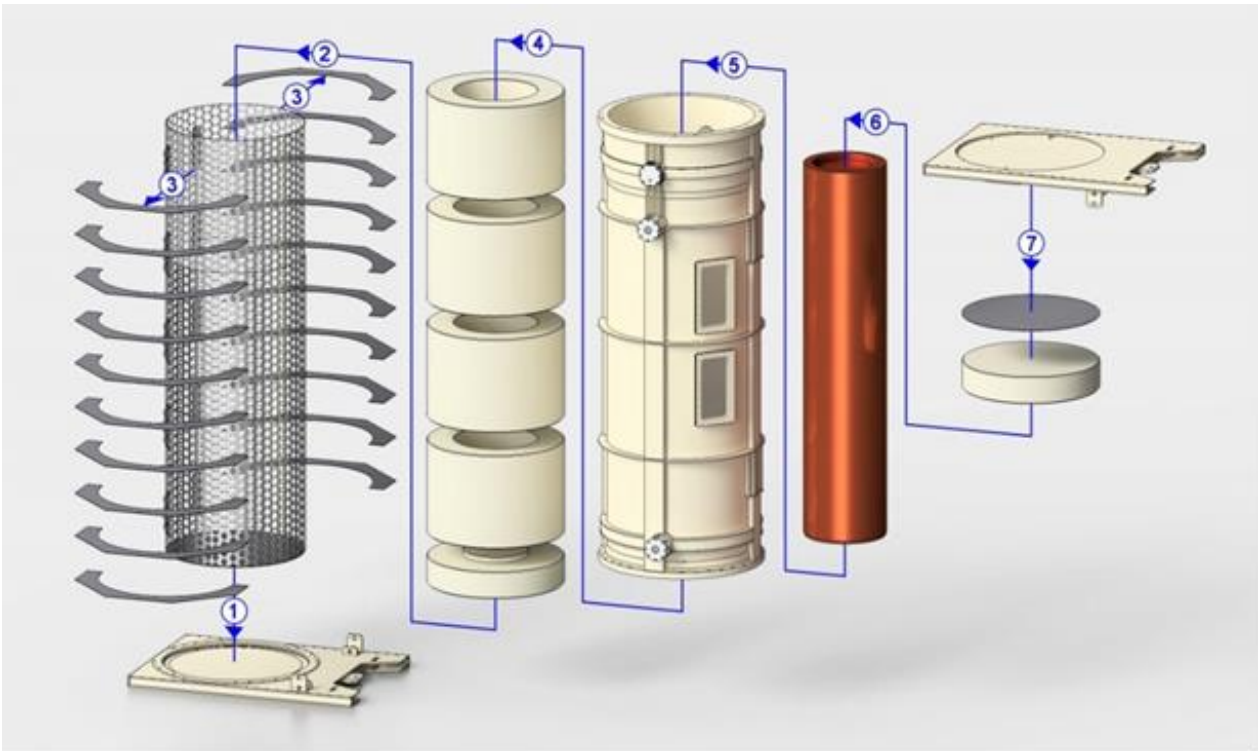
Illustration of the KBS-3H supercontainer assembly and placing the supercontainer in the transport tube (Posiva 2018b).
